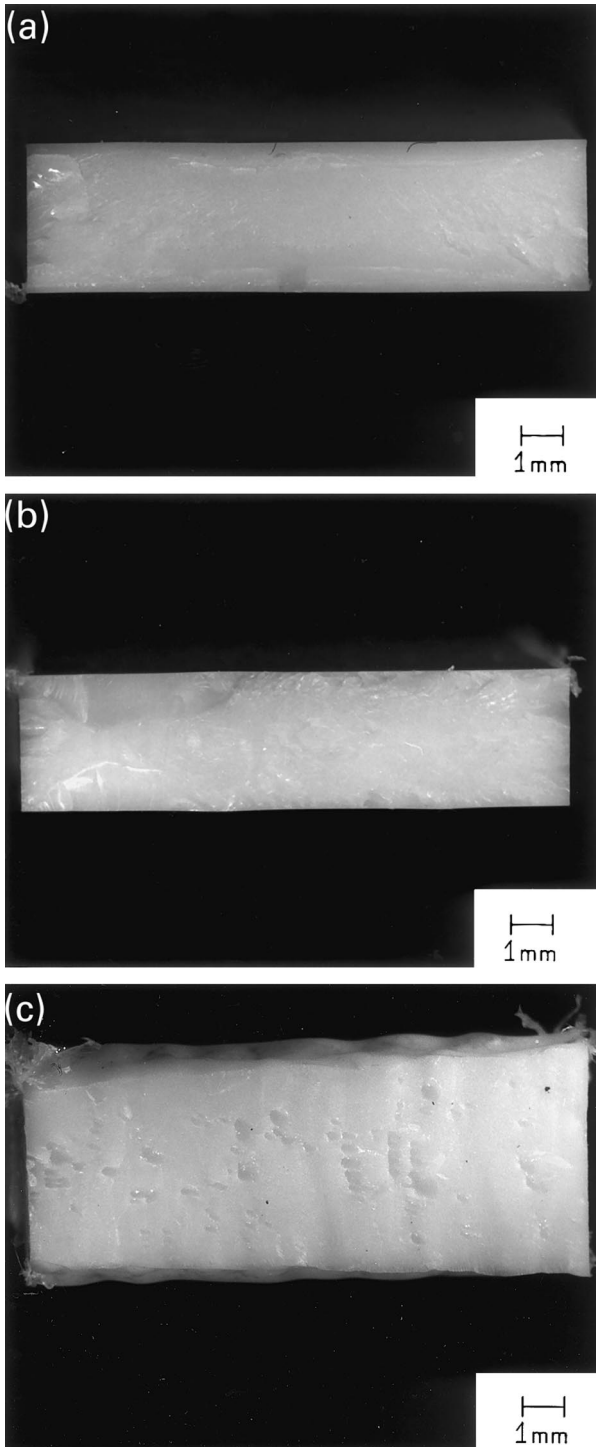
Fracture surfaces of 3.2-mm-thick PBT specimens for hot-tool welds made at (a) $T_H = 260^\circ\text{C}$, (b) $T_H = 320^\circ\text{C}$, and (c) $T_H = 380^\circ\text{C}$. In these welds, the melt penetration was 0.66 mm and the melt time was 15 s.
